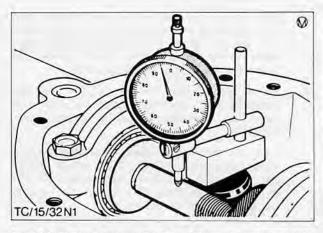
Dial indicator reading 95 – shim under master pinion too thick
